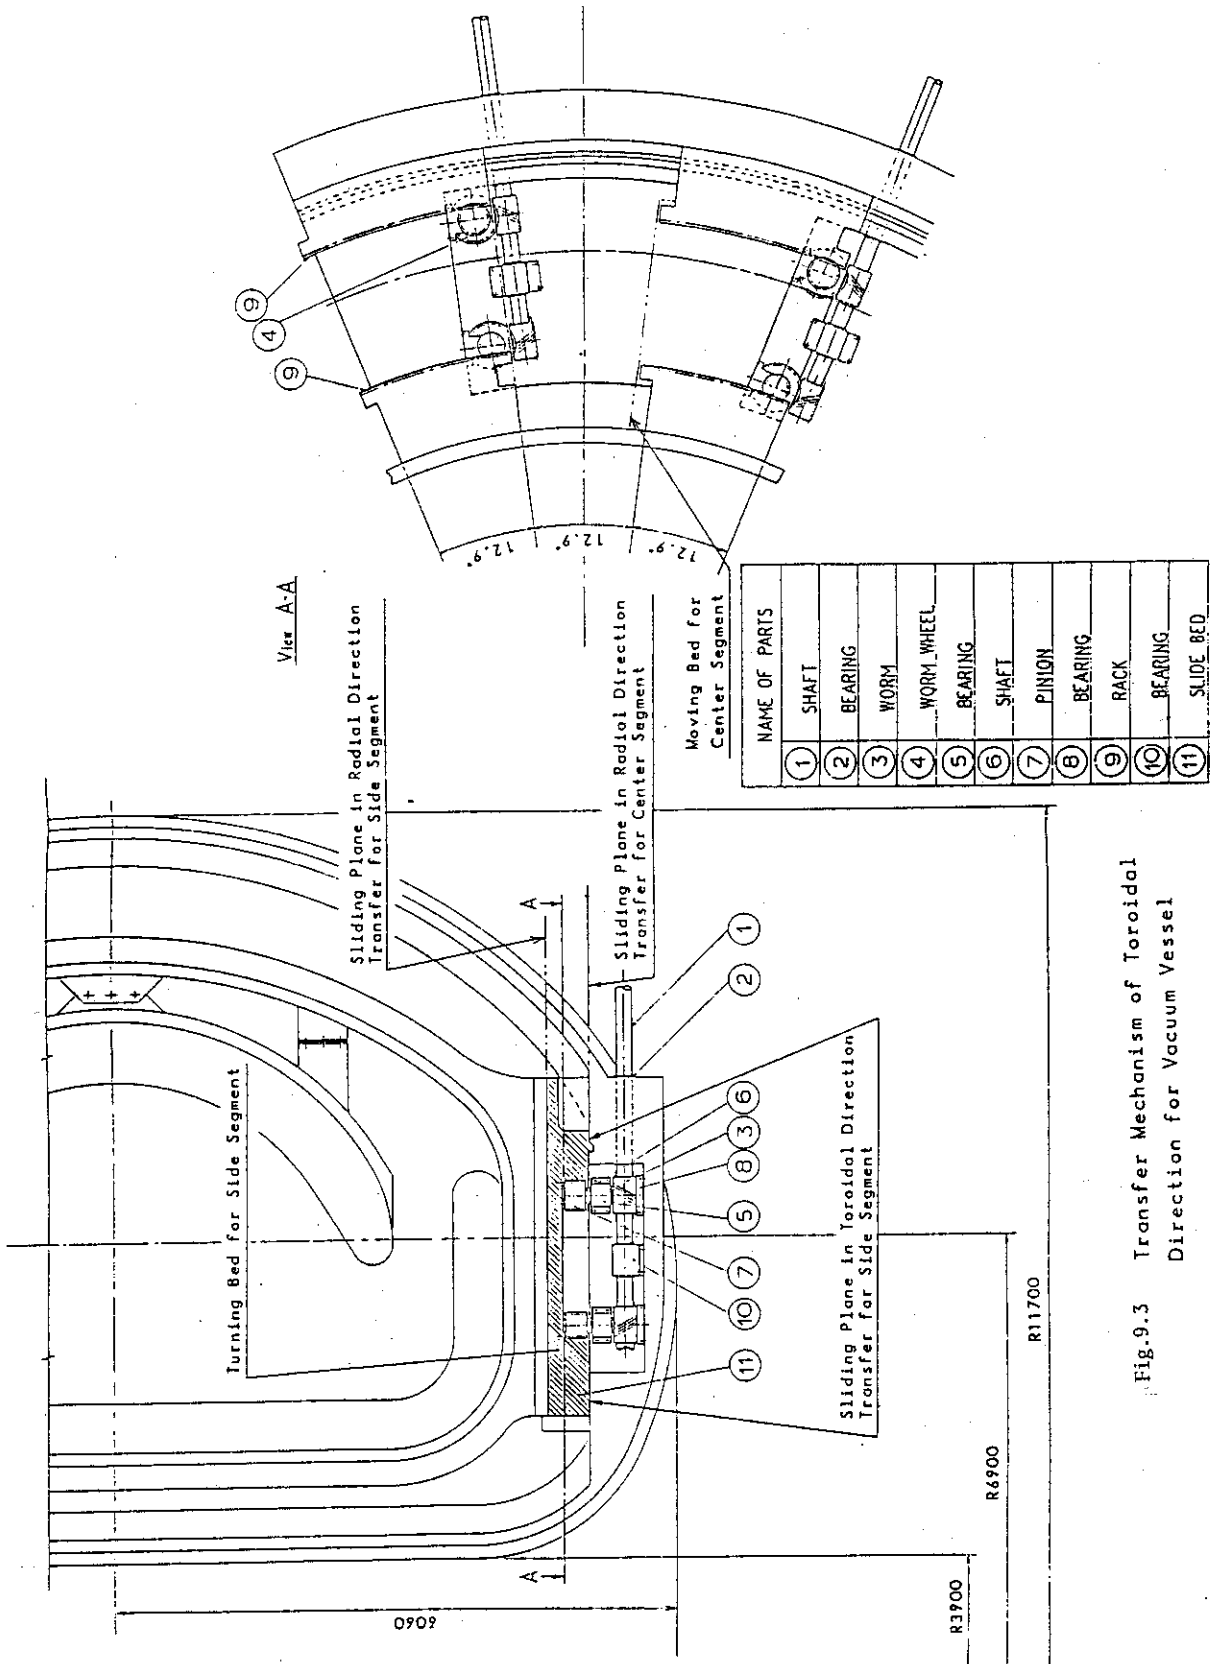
Transfer Mechanism of Toroidal Direction for Vacuum Vessel
